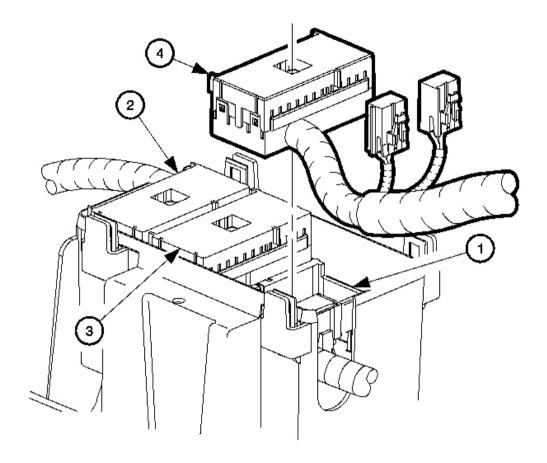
Installing Connectors Into Proper Location Courtesy of GENERAL MOTORS CORP.
